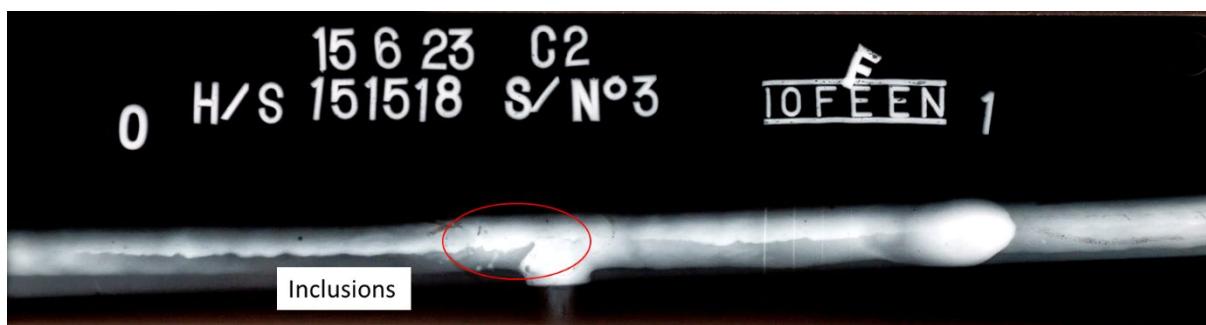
Radiograph of circumferential weld in a pressure vessel. Inclusions in the weld are highlighted in red.
